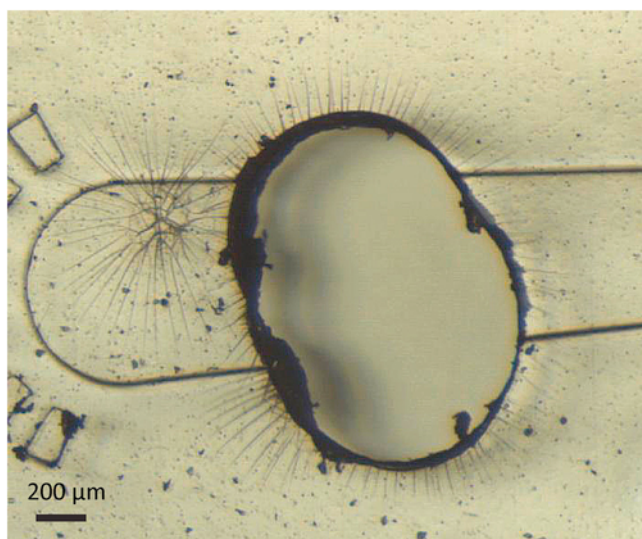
Cracks appear when an access hole is drilled after thermoembossing a commercial COC sheet.
